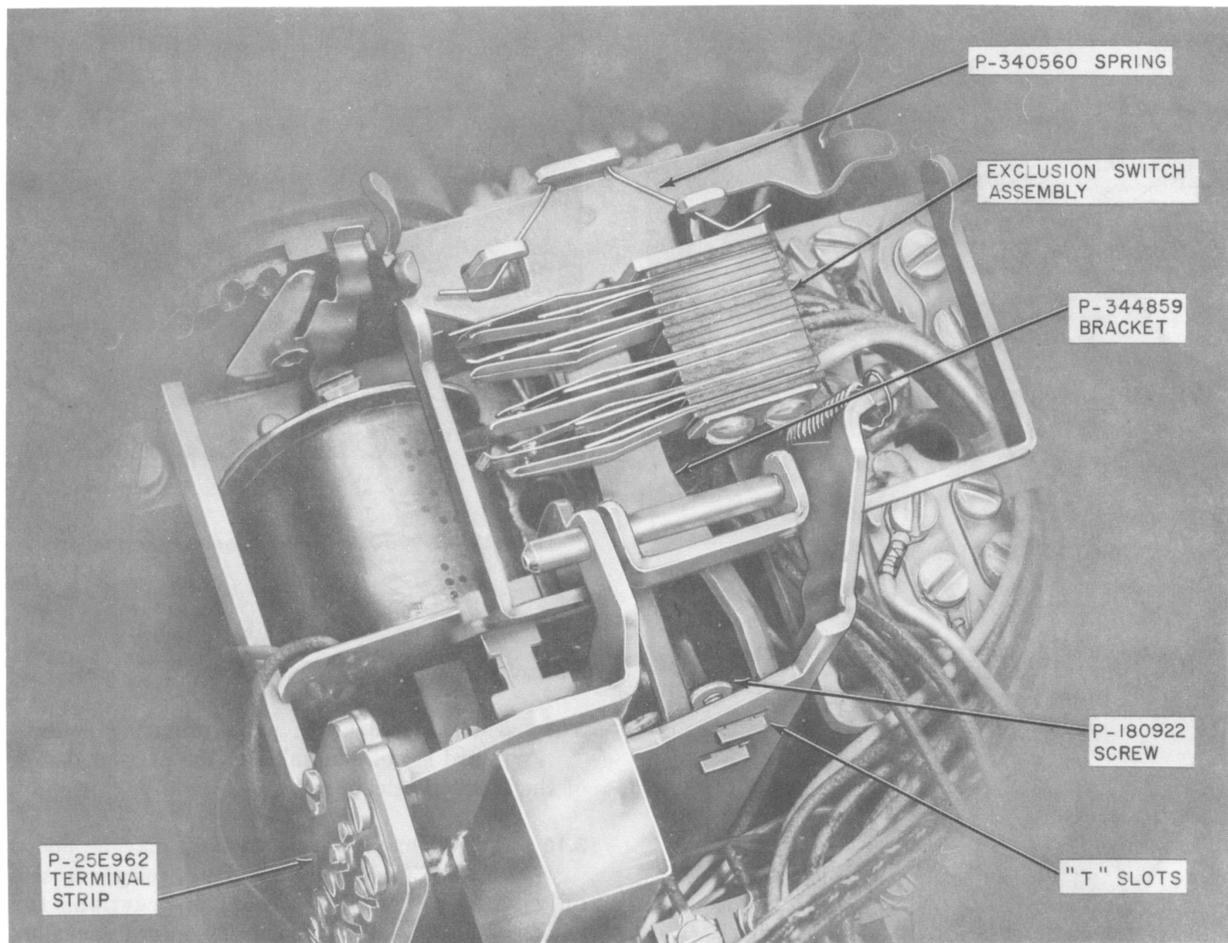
D-179935 Kit of Parts and Auxiliary Terminal Strip, Installed
